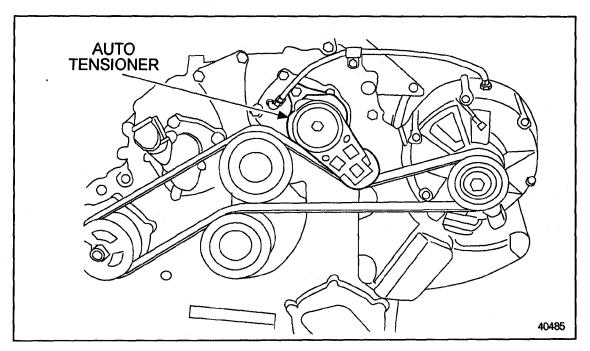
Auto Belt Tensioner Assembly with 50 DN Alternator
